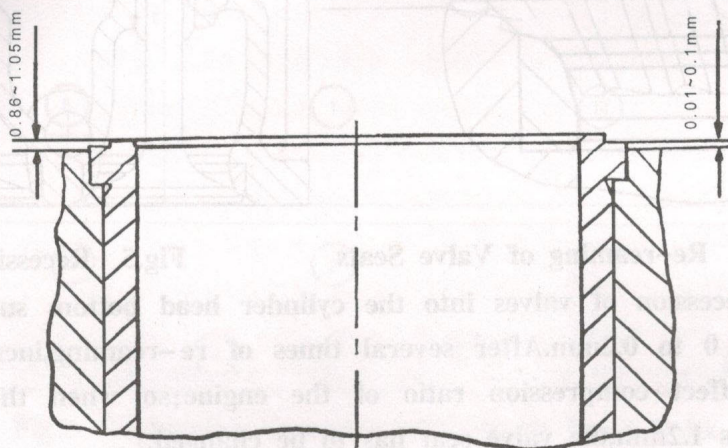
Projection of Liner Flange Over the Top Face of Cylinder Block
